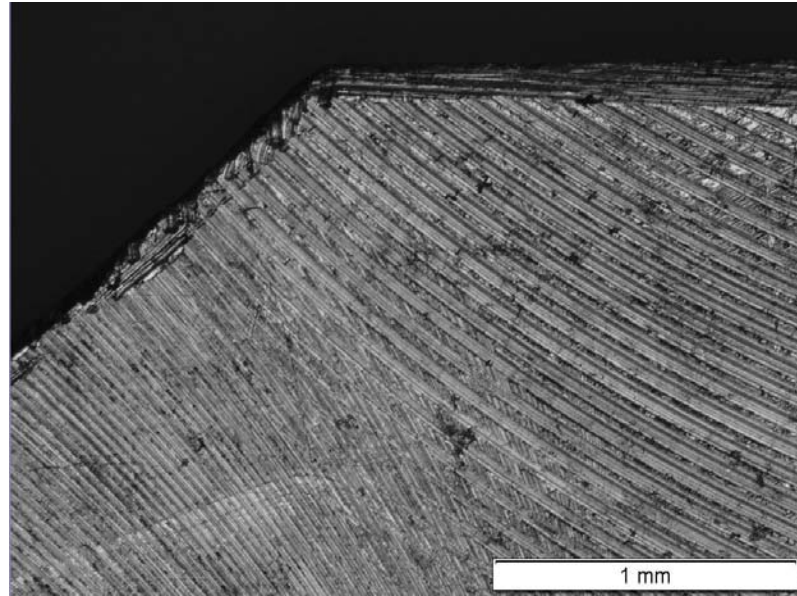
AA7050-T7541 radius and grip area interface exhibiting rough surface condition due to CNC machining tool manufacturing.
